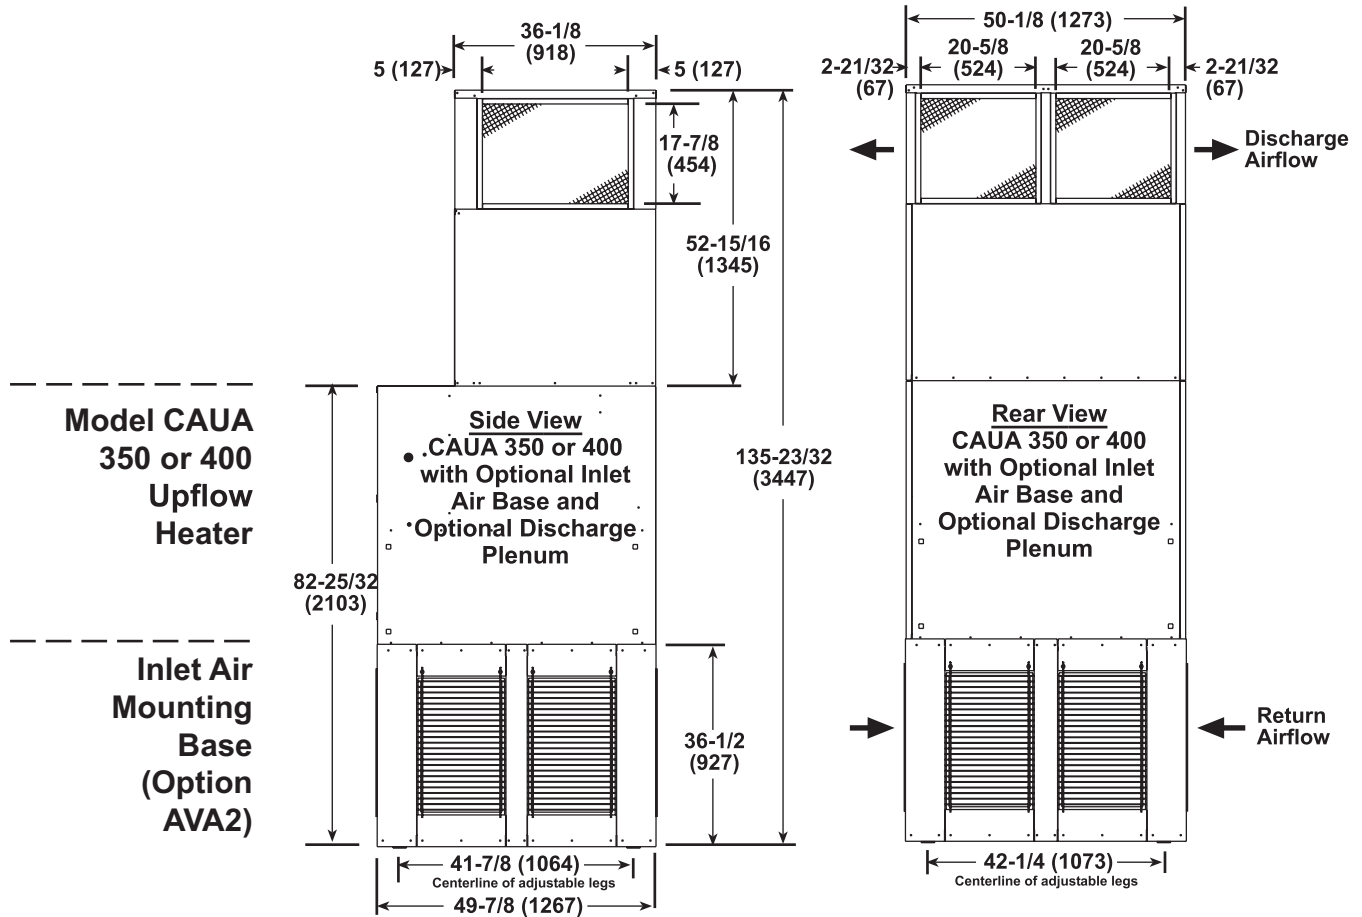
Model CAUA Dimensions with Discharge Plenum and Option AVA2 Inlet Air Mounting Base
